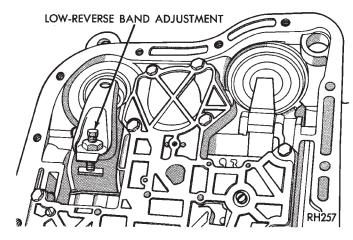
Rear Band Adjustment Screw Location VALVE BODY
